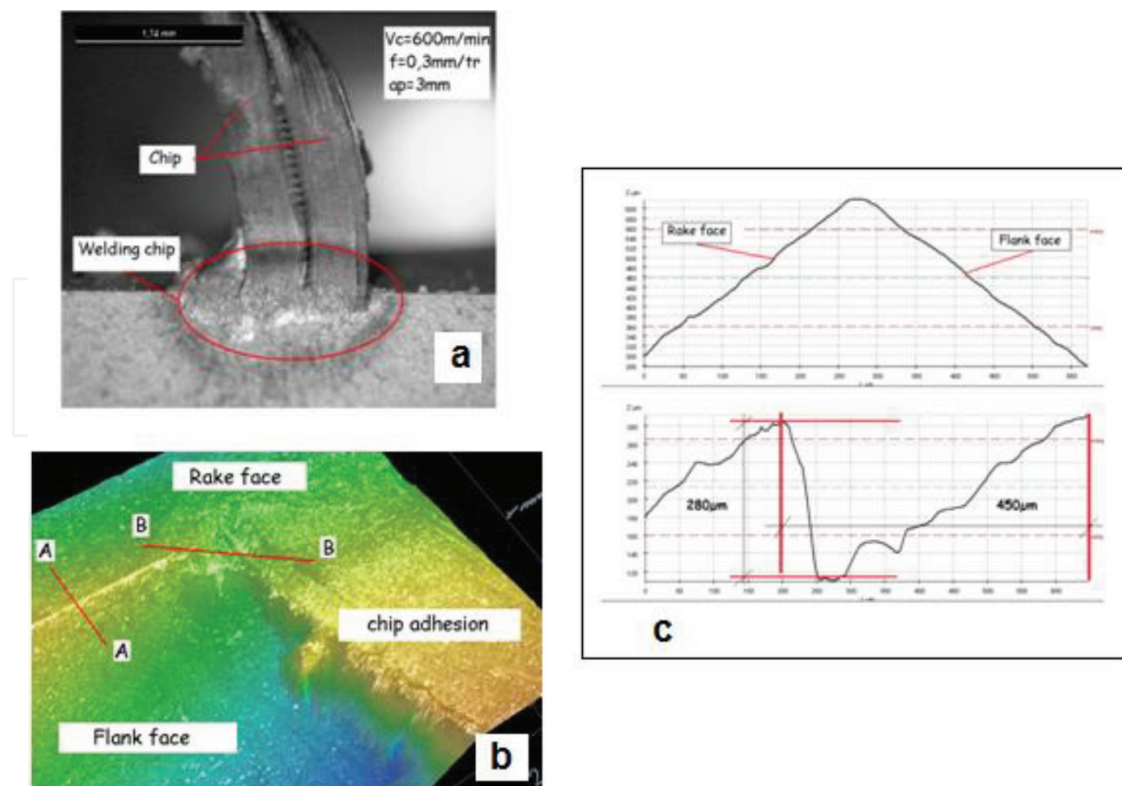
(a) Photography of chip welding on rake face, (b) 3D confocal image of the cutting insert (600 m/min, $f = 0.1$ mm/rev, $a_p = 3$ mm), (c) profile diagram obtained by skew right unworn cutting edge and profile of crater failure under chip welding.
